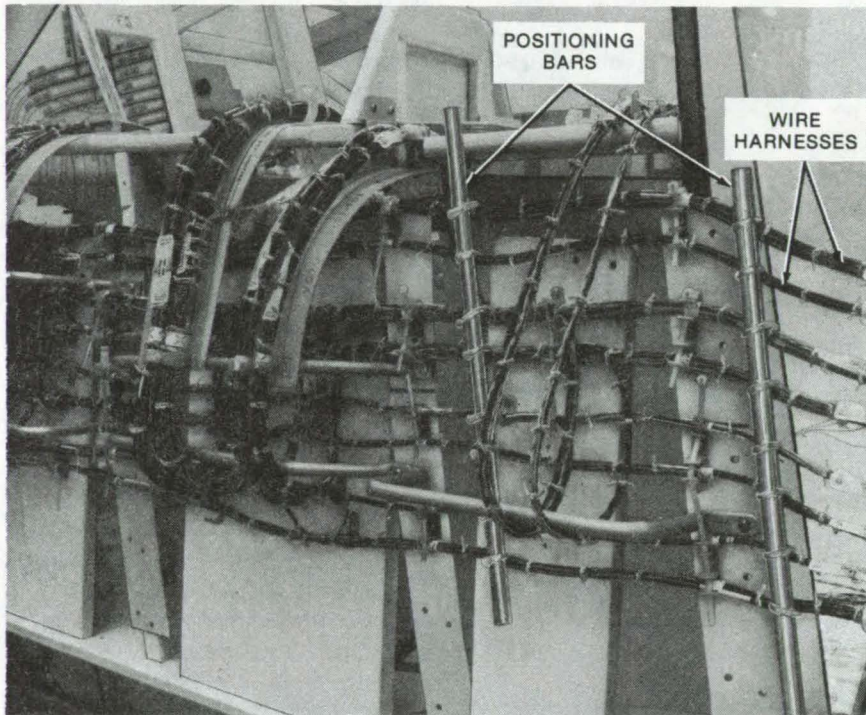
Positioning Bars preserve wire harness alignment during transport between the jig board and final assembly.
